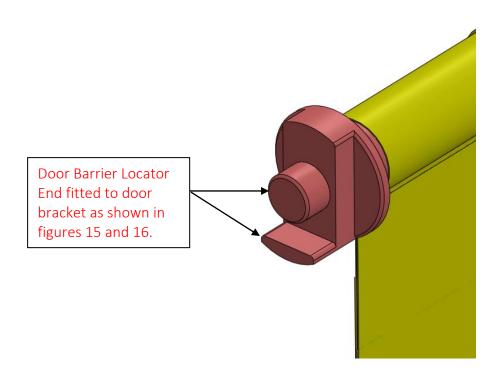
Door Barrier Locators (Part no. 512CA29)
